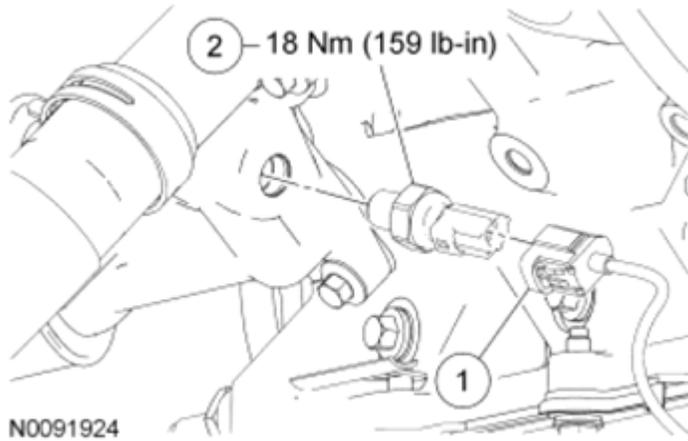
Locating Engine Oil Pressure (EOP) Switch With Torque Specification
